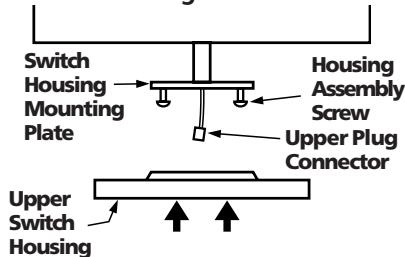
Attaching Upper Switch Housing to Switch Housing Mounting Plate
